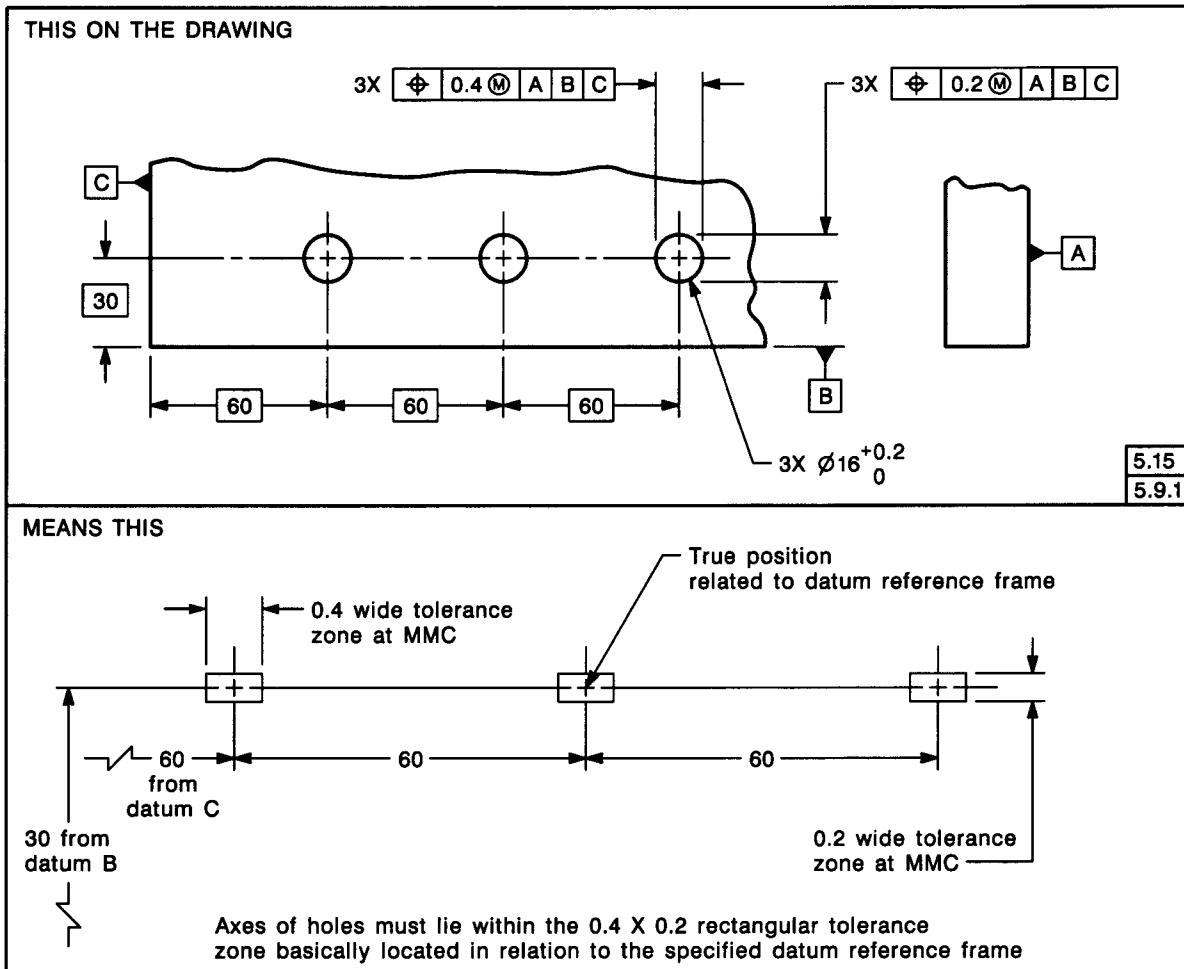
BIDIRECTIONAL POSITIONAL TOLERANCING, RECTANGULAR COORDINATE METHOD
